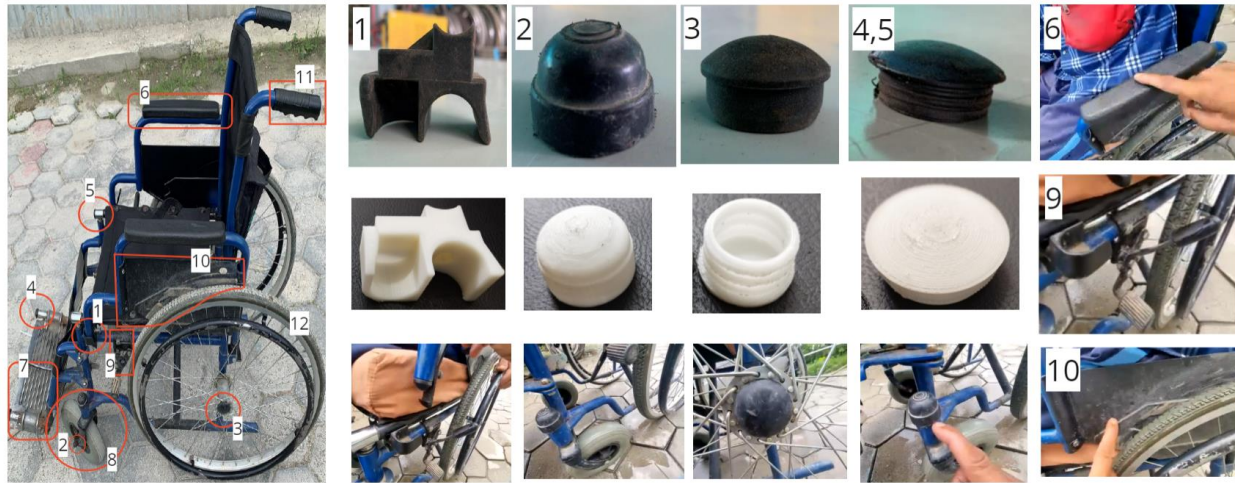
(1) Seat Clamp (2) Caster ring cap (3) Wheel cap (4) Ring cap A (5) Ring cap B (6) Armrest (7) Footrest (8) Caster wheel (9) Brake (10) Arm rest side panel (11) Push grip
